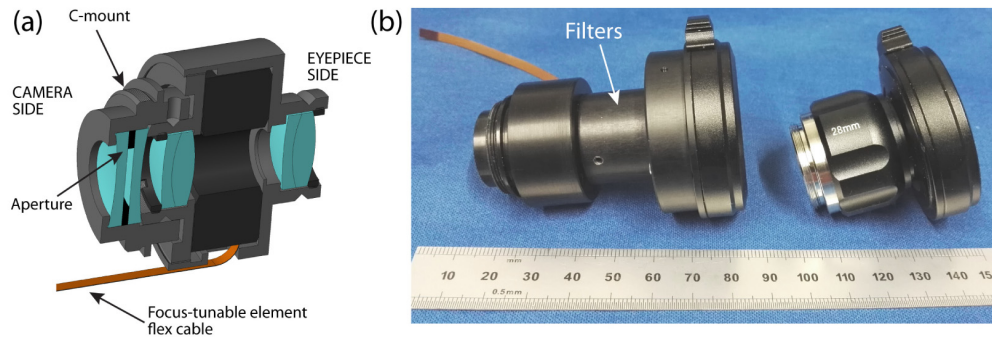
(a) CAD section view of the custom housing that holds the optical components. (b) Image of the TLS (left) next to a conventional 28 mm laparoscope adapter (right). The generous space for filters could be readily reduced by 10 mm if required.
